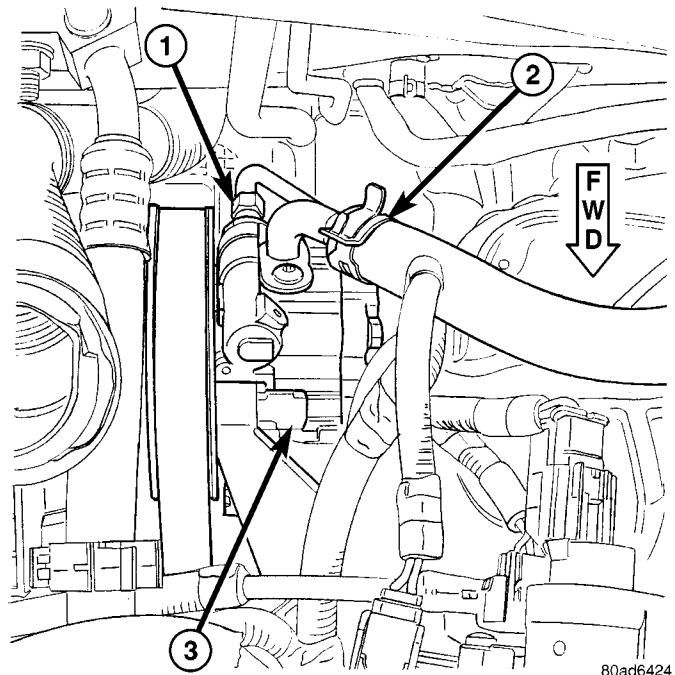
Supply & Pressure Hoses At Pump - 3.3L/3.8L Engine
